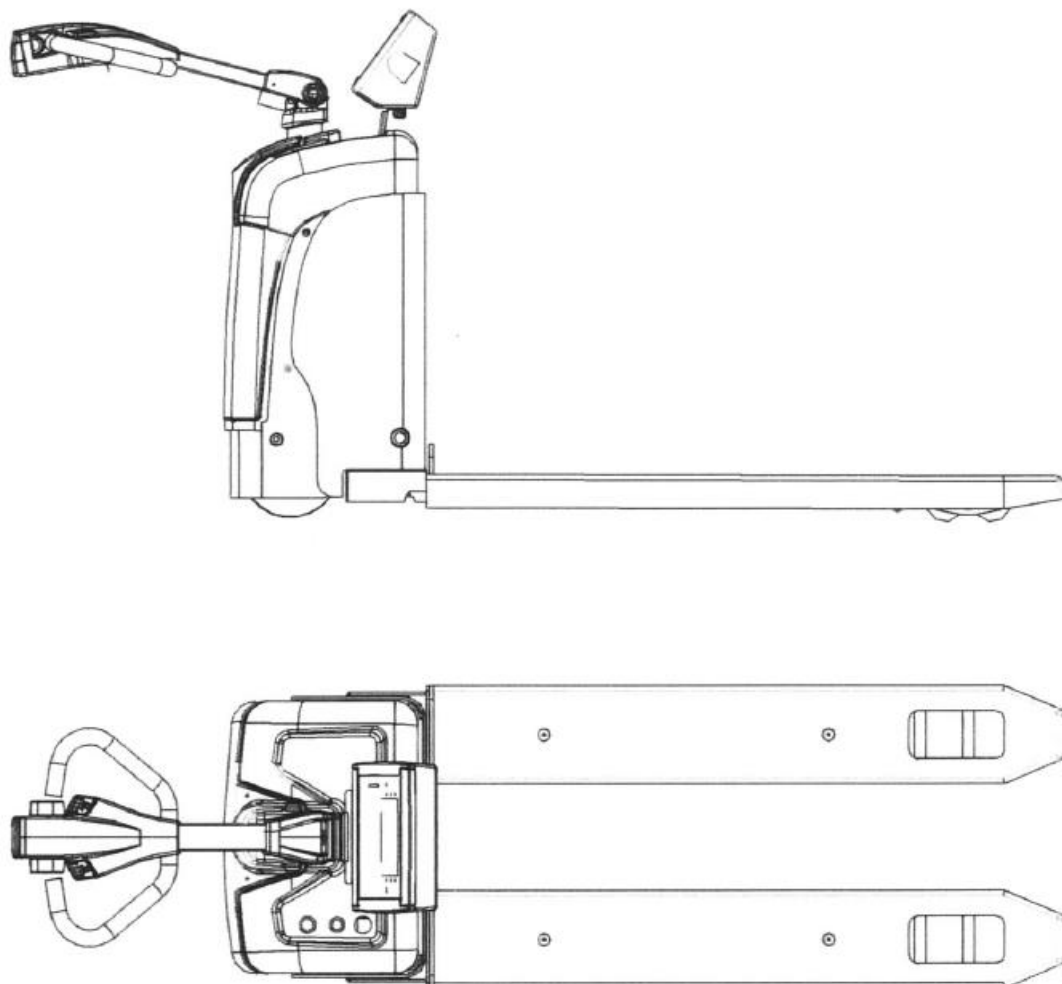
TPWaa-X Pallet truck Scale – short column.
